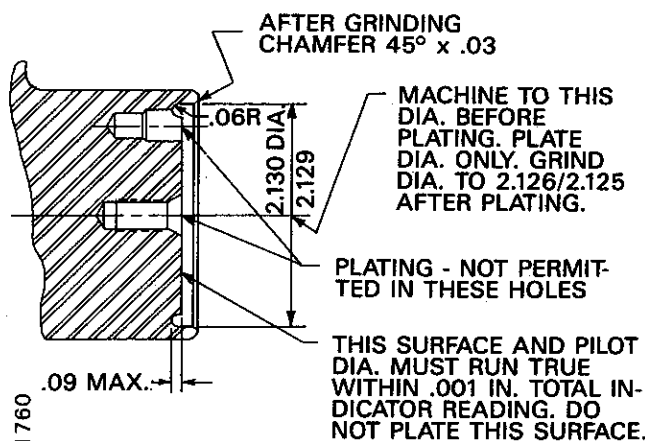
A. Details for Repairing Pilot Diameter of Crankshaft
